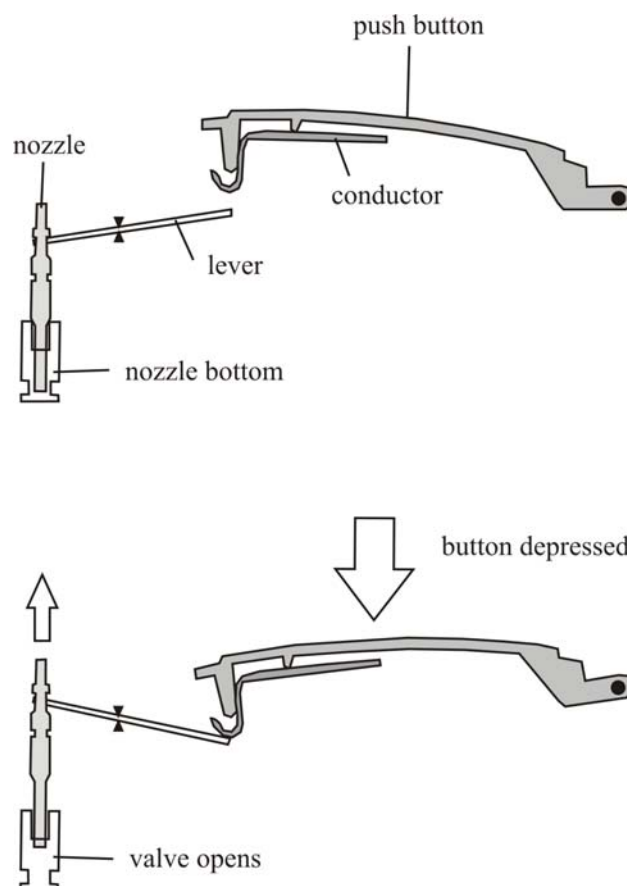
Opening of upper coil (nozzle) valve when push button is depressed.
